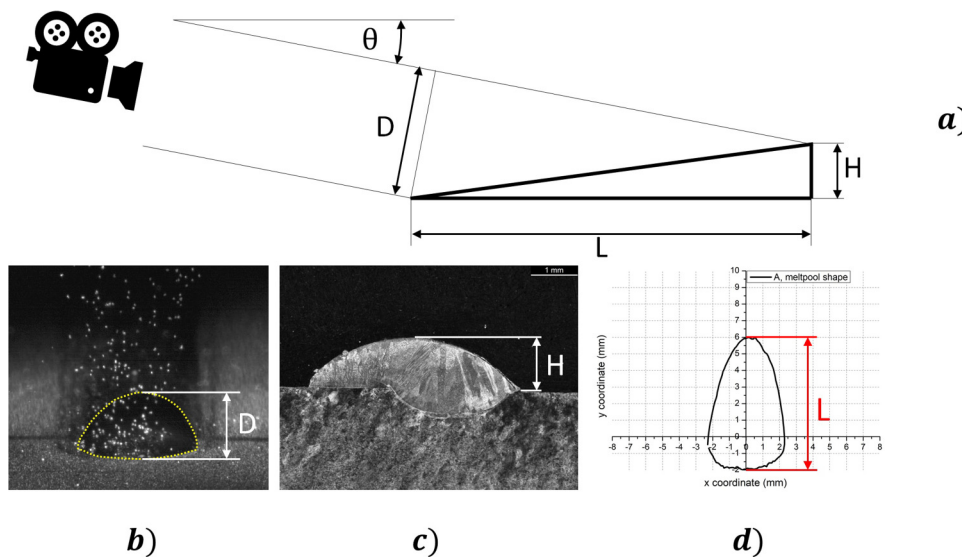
(a) A schematic of the video capture geometry. (b) A typical single frame from the video (“A” track). (c) A typical “A” track cross section. (d) A typical calculated melt pool geometry (plan view “A” track).
